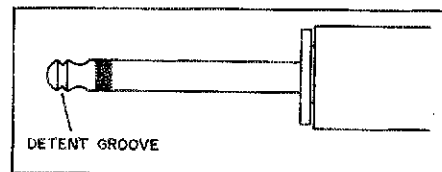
For mating a single-circuit plug with a three-wire jack, a groove is cut in the tip of the plug as shown here.
